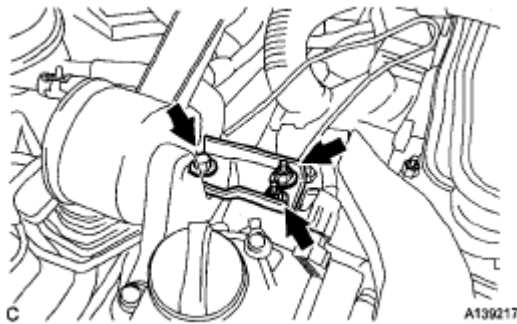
Locating Nuts On No. 2 Engine Mounting Stay RH
